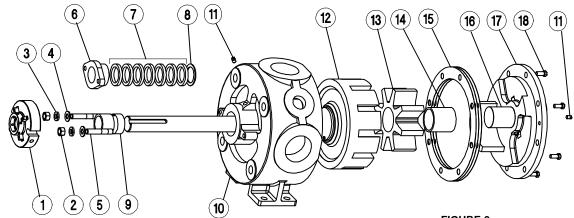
EXPLODED VIEW HL34 AND 434 PUMPS
